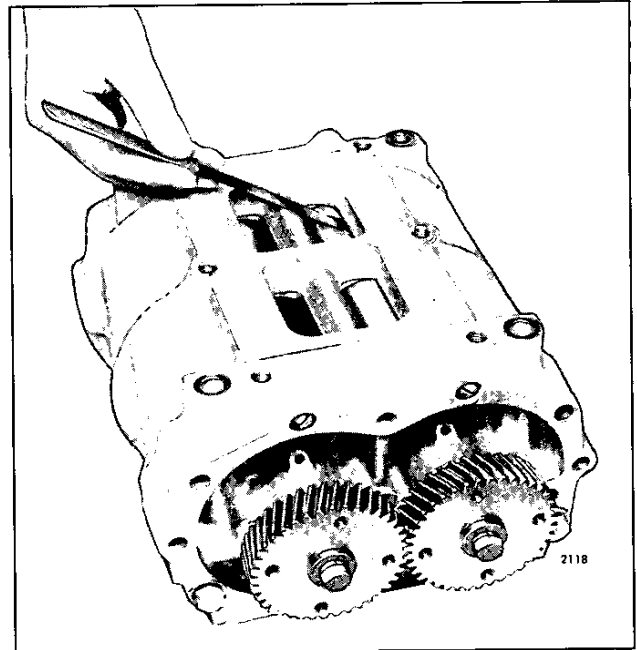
Measuring Rotor Lobe to Housing Clearance
